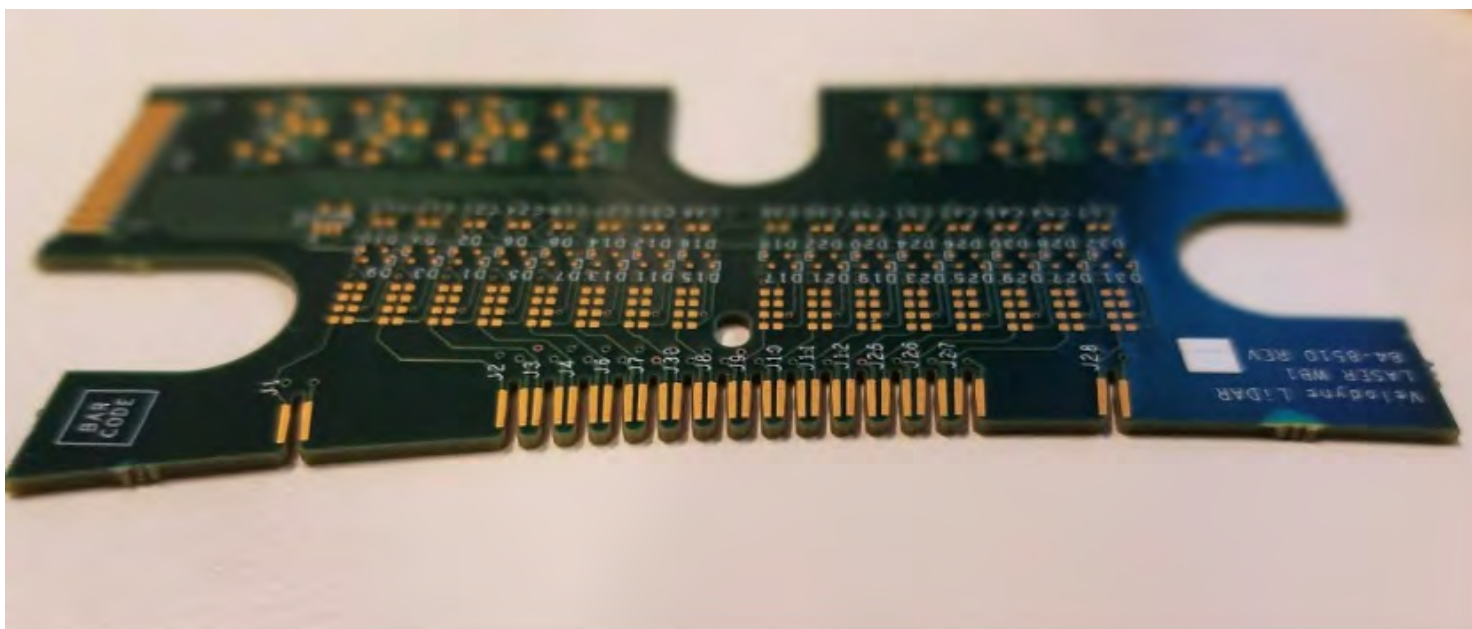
Laser-cut board edges with plating closer to the edge than thought possible could change the way PCBs are connected.
